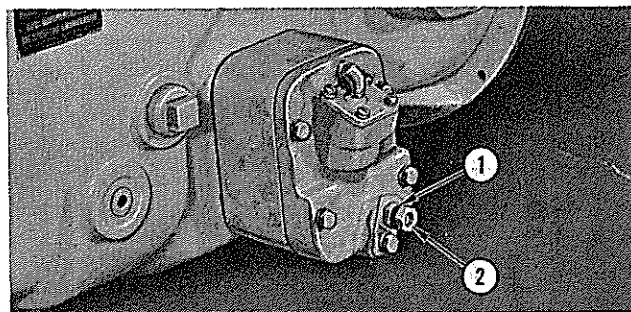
CLUTCH BRAKE ADJUSTMENT
